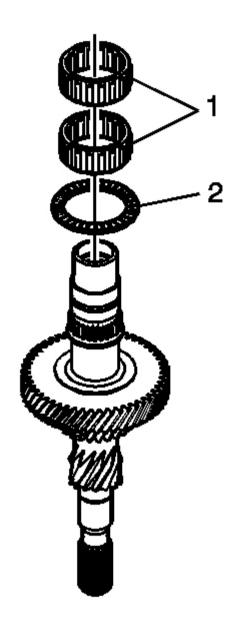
View Of Caged Needle Bearing & Thrust Bearing Courtesy of GENERAL MOTORS CORP.
